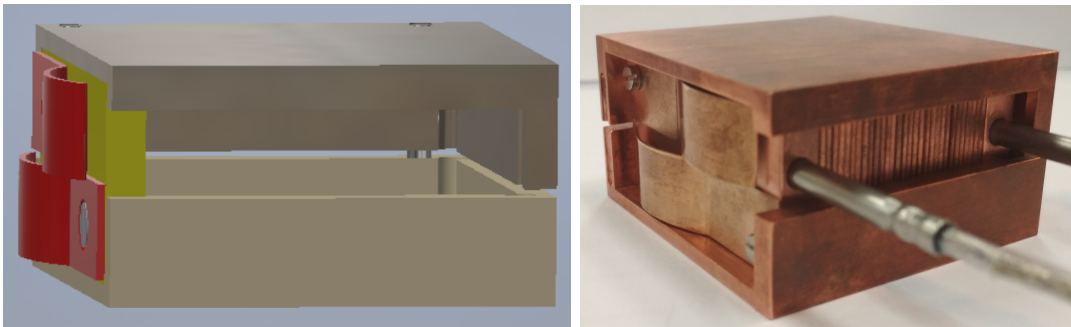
New design of the copper box, which incorporates the sensors stacked horizontally instead of vertically as CAD [116] (left) and photograph (right)
